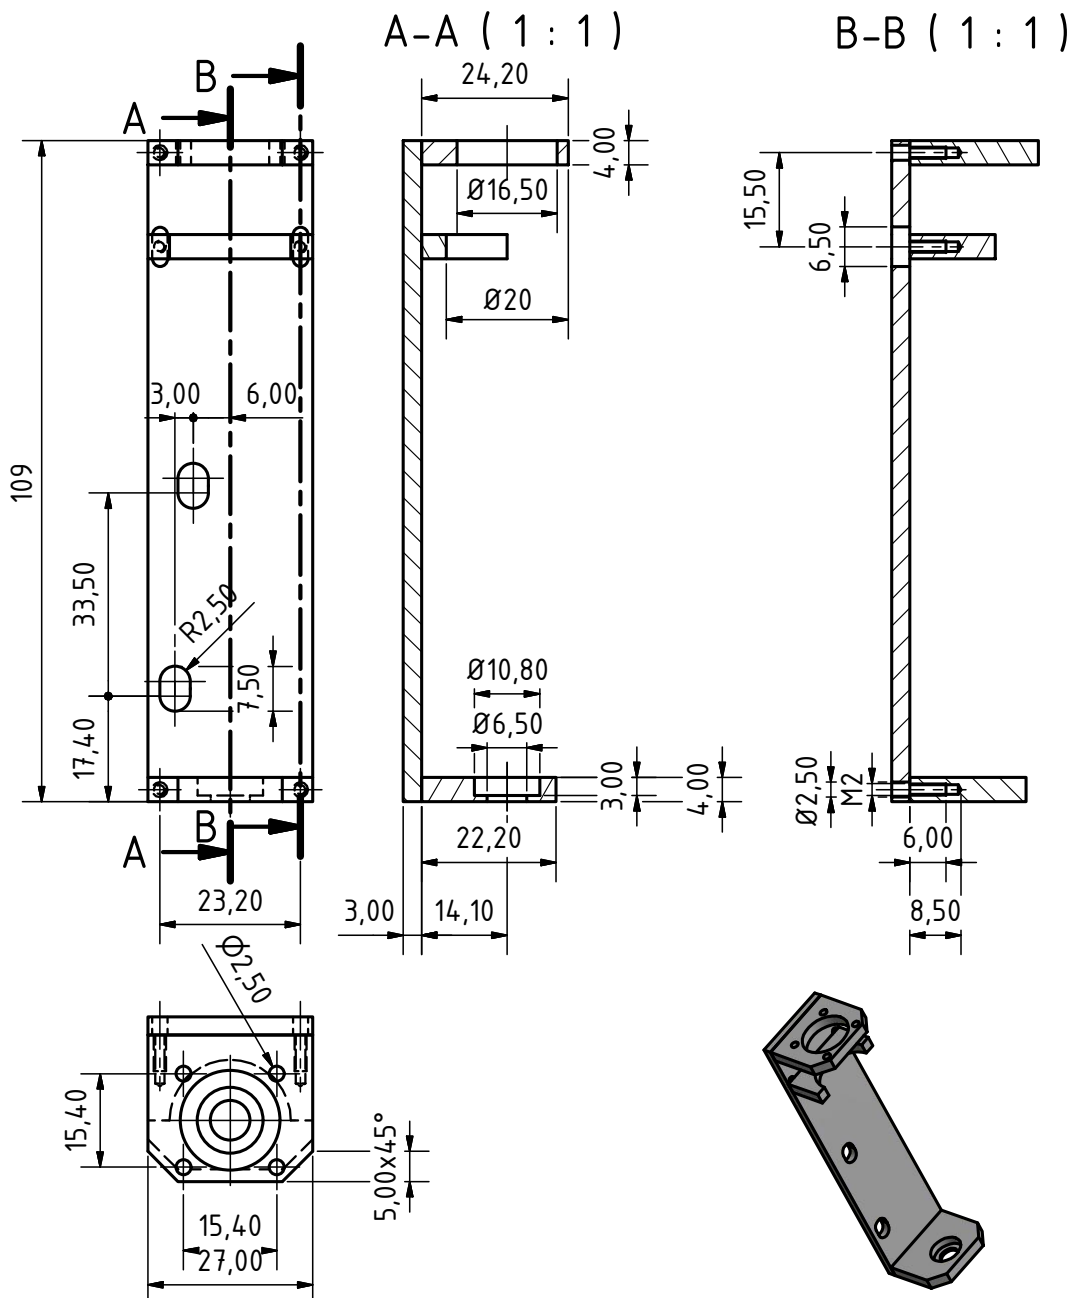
Drawing of the holder for the cartridge and linear stepper motor.
